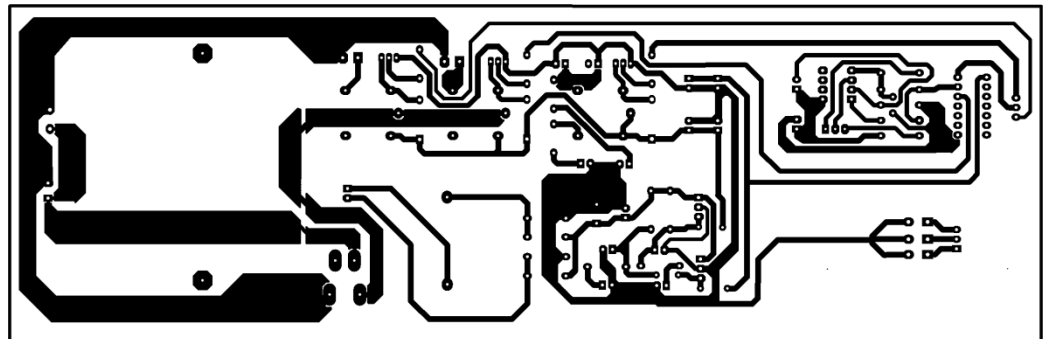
Driver Component Layout of Fan, Pump and Lamp
